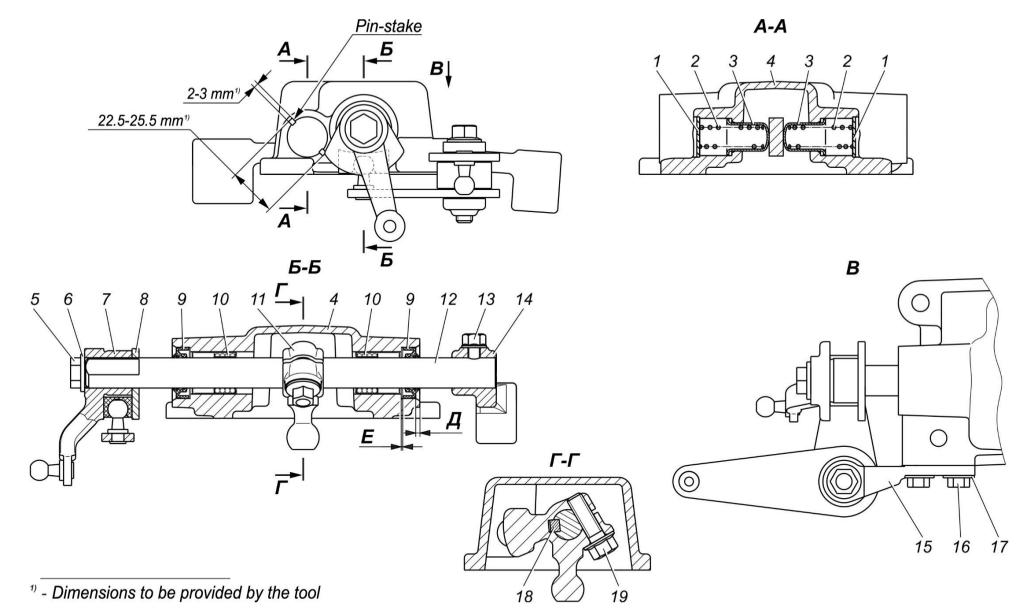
Control linkage cover assembly: 1 - plugs; 2 - safety-lock springs; 3 - engagement safety-locks; 4 - control linkage cover; 5, 13, 16, 19 - bolts; 6, 8, 17 - washers; 7 - engagement lever; 9 - collar seals; 10 - linear motion ball bearings; 11 - gear-shift lever; 12 - gear-shift shaft; 14 - counterweight; 15 - selection lever assembled with support; 18 - key.
